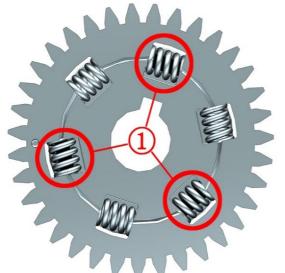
RIGHT CRANKCASE ASSEMBLY		ZT158MJ balance shaft gear assembly -1	CHK
